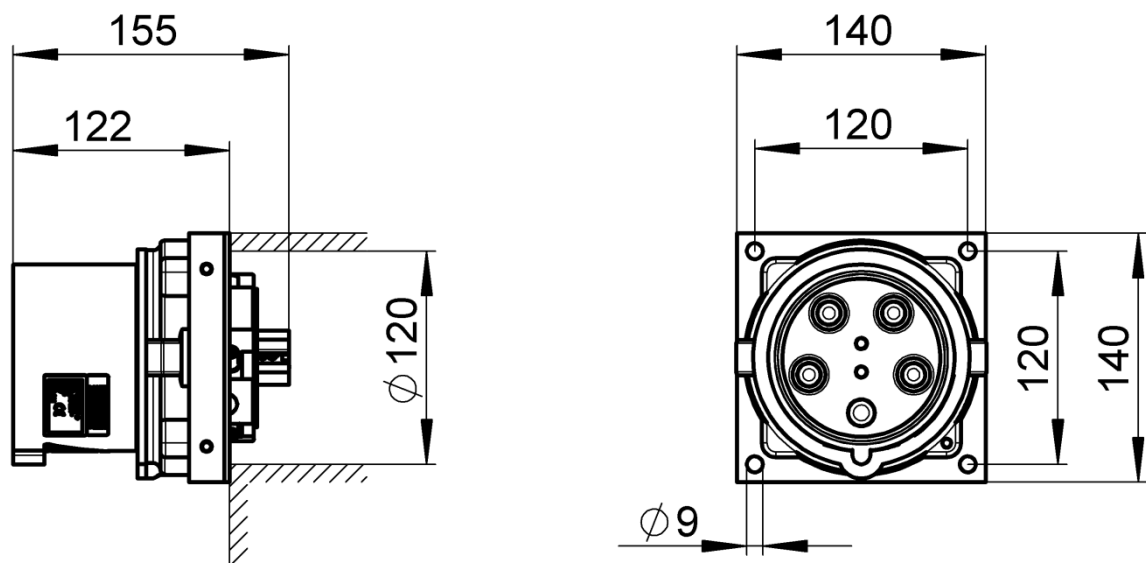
Dimensions Male Connector Panel MCP D-Line, C-Line (160A – 250 A) in mm
